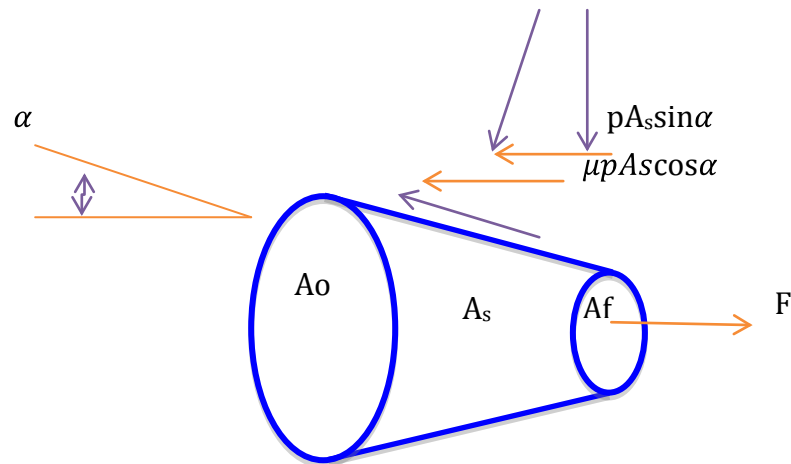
Stresses acting on elemental section of the drawn wire during drawing
